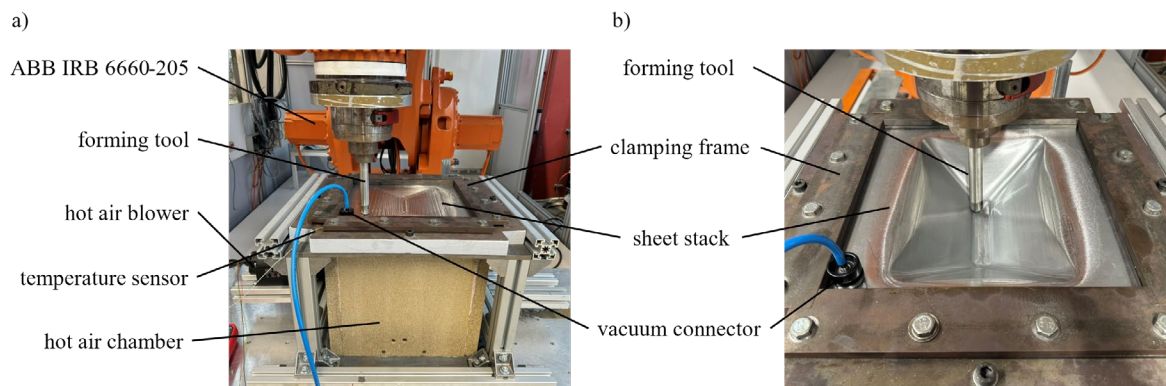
a) SPIF setup with clamped vacuum stack layup; b) Clamped sheet stack during forming
